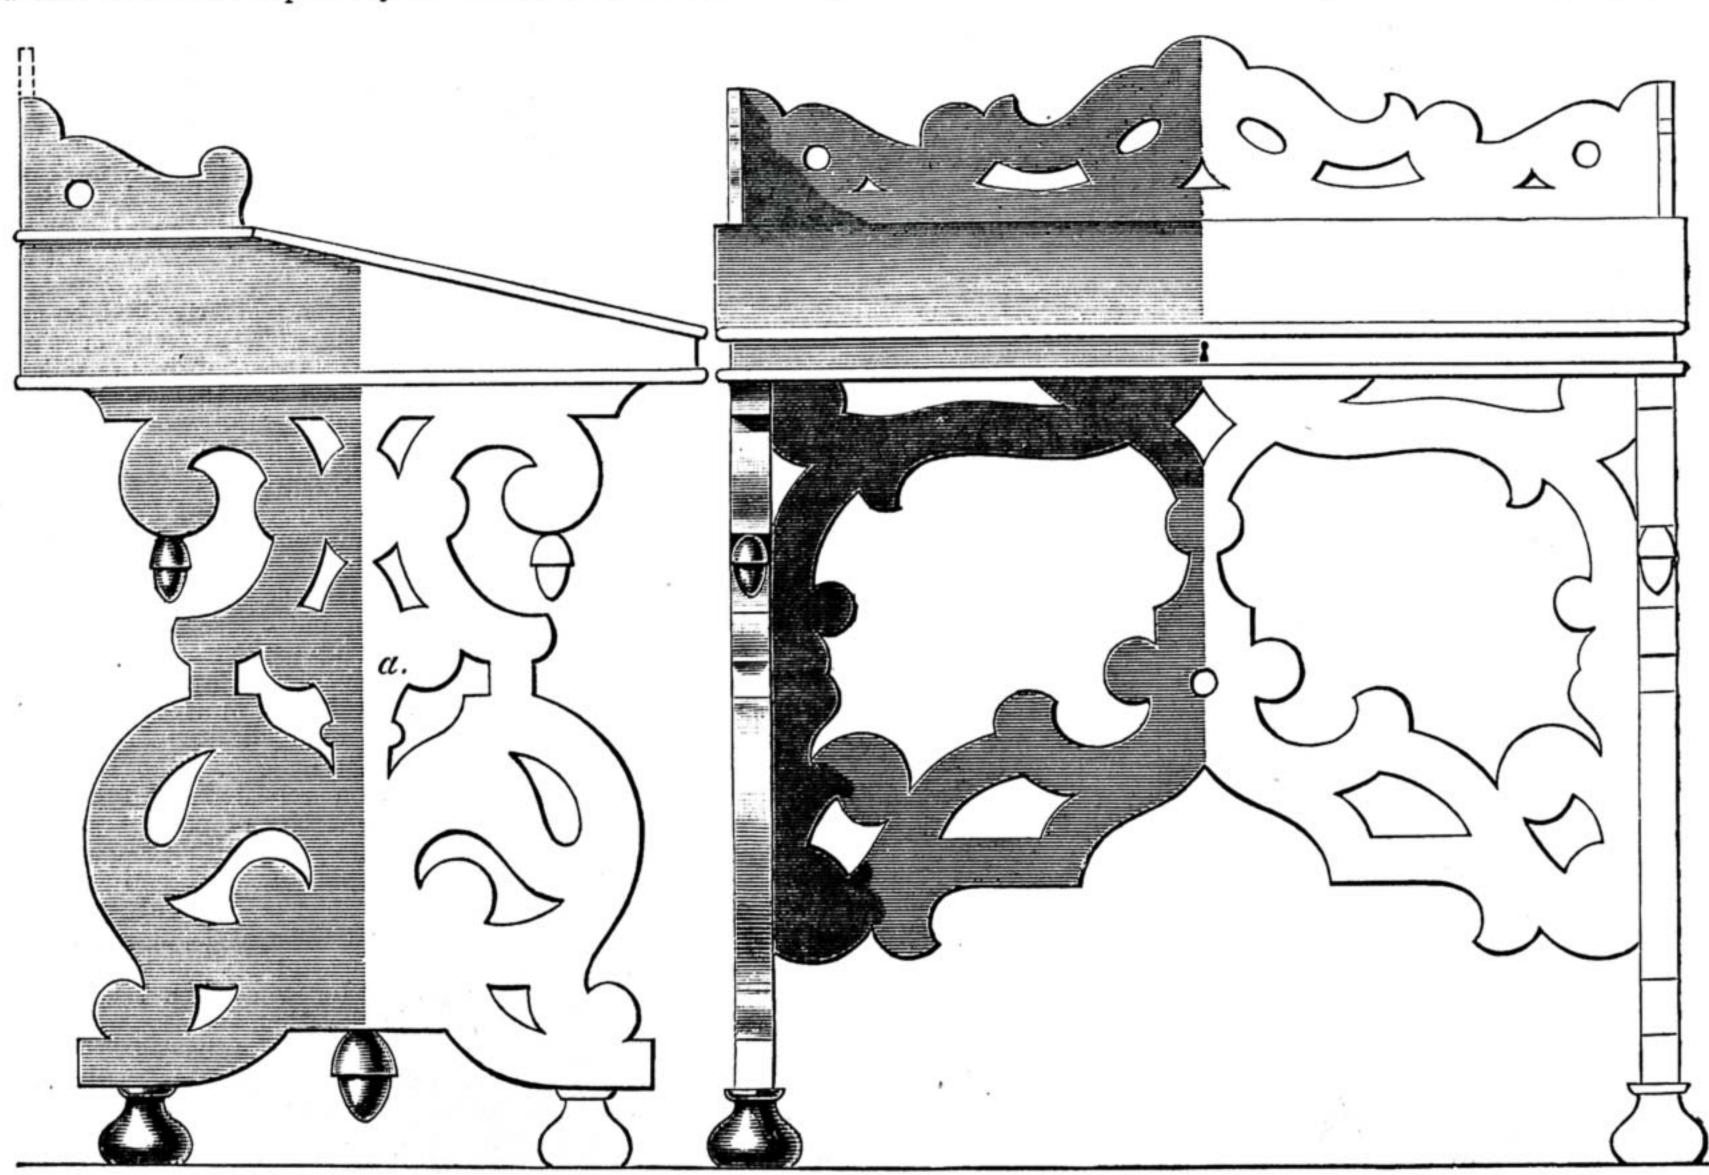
Davenport in Papier-Mâché: End Elevation.
